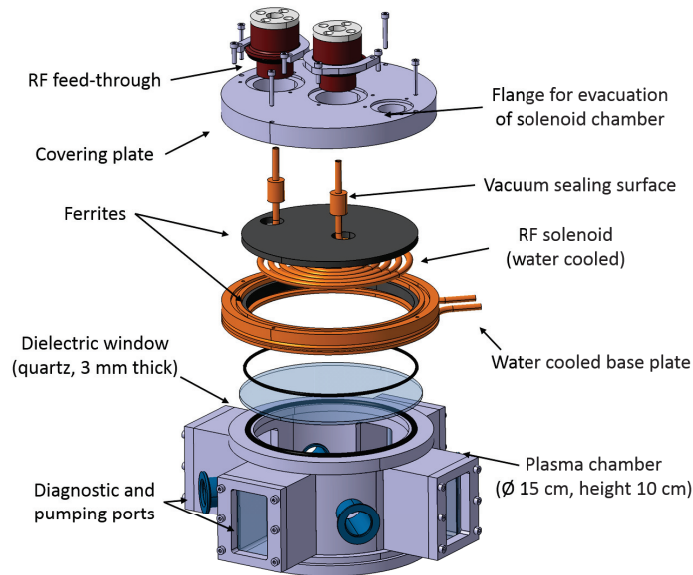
Exploded assembly drawing of the setup of the PlanICE experiment.
